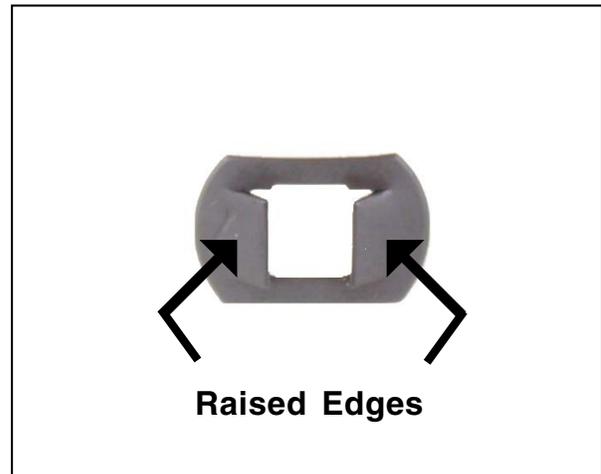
Spindle mounting clip with raised edges facing upwards
